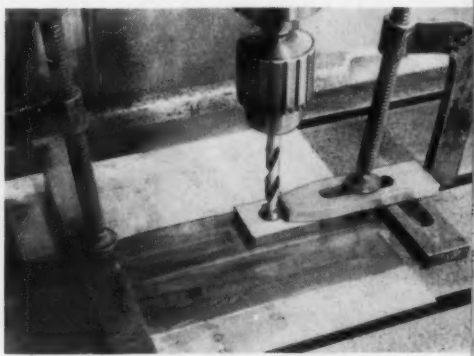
Sheet metal being drilled with "fishtail" drill guided by drill bushing in jig block clamped firmly to work surface.
